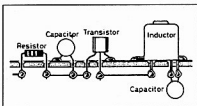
Wired-track RF construction, using a single-sided board, copper side uppermost. (Courtesy RadCom).
